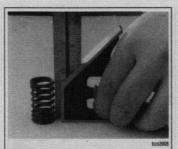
Check the valve spring for squareness on a flat surface; a carpenter's square can be used
